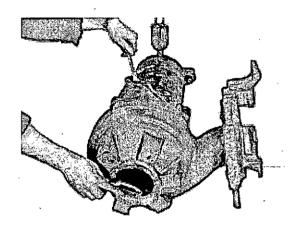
Setting impeller clearance using the set screws and feeler gages.
